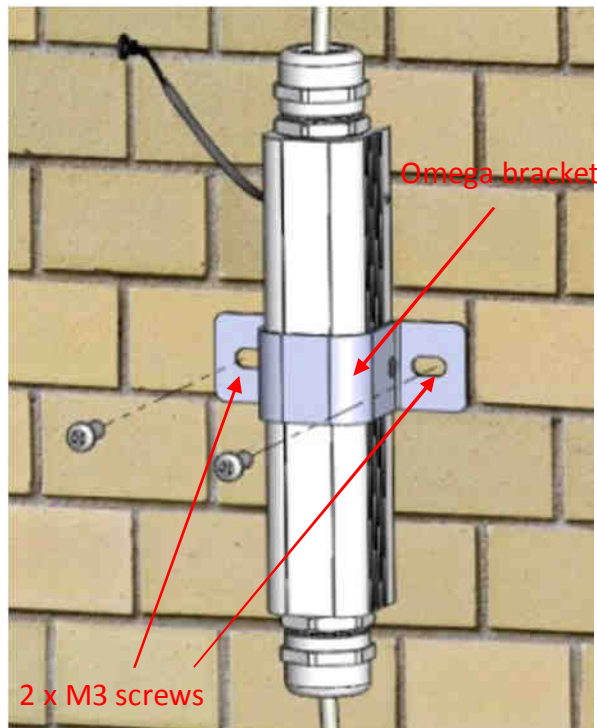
Outdoor Ethernet Surge protection – wall mounting
